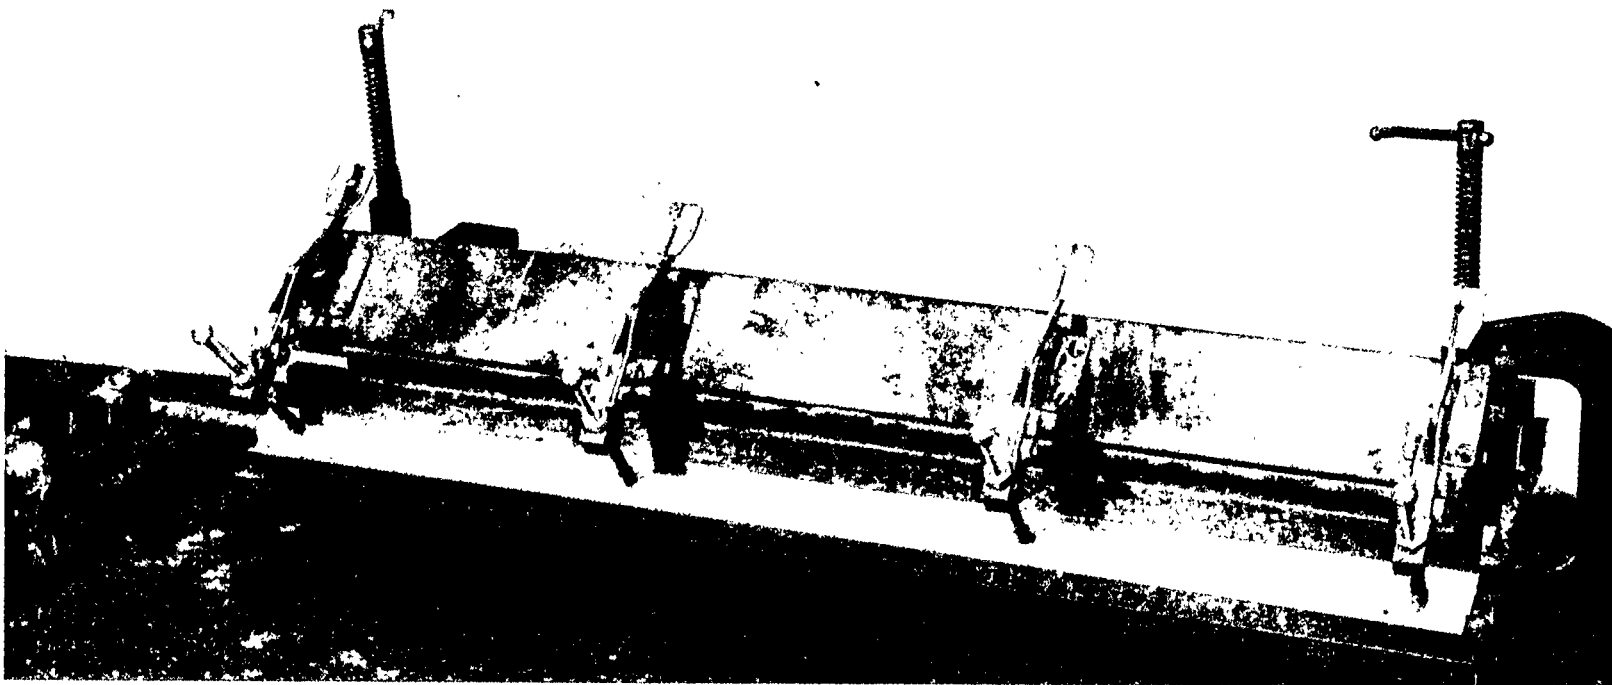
MECHANICAL DEVICE FOR HOLDING IN
